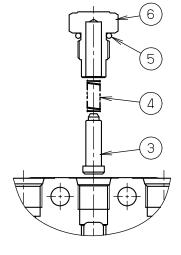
Check valve (P3 conflux, travel, boom lock valve)
